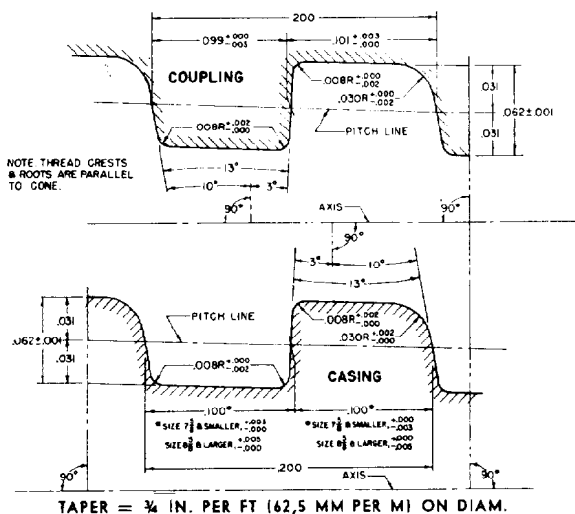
Line pipe thread form. Buttress casing thread form and dimensions for casing sizes 4½ to 13½ in.
